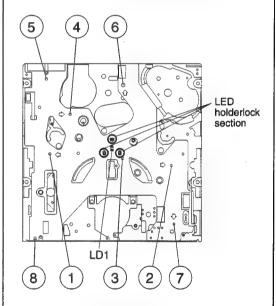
(2) — Mechanism unit bottom side —
